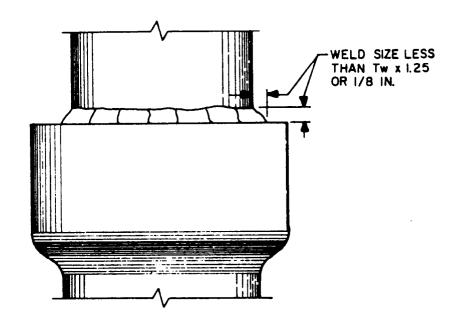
Weld Nomenclature and Minimum Dimensions for Socket Weld Components Other Than Flanges.
